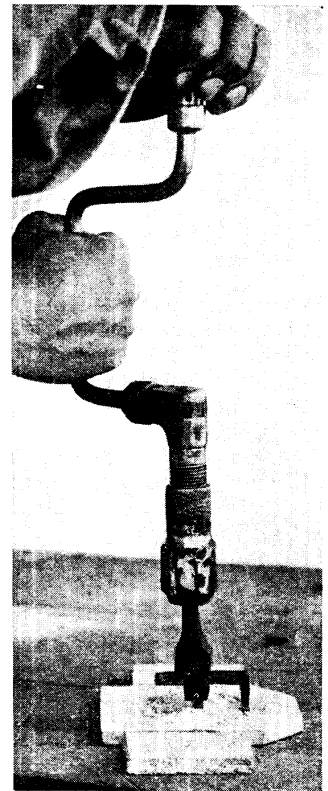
By cutting an annular groove in this manner in the face of an end cheek, a recess is made for a tube to be fitted
